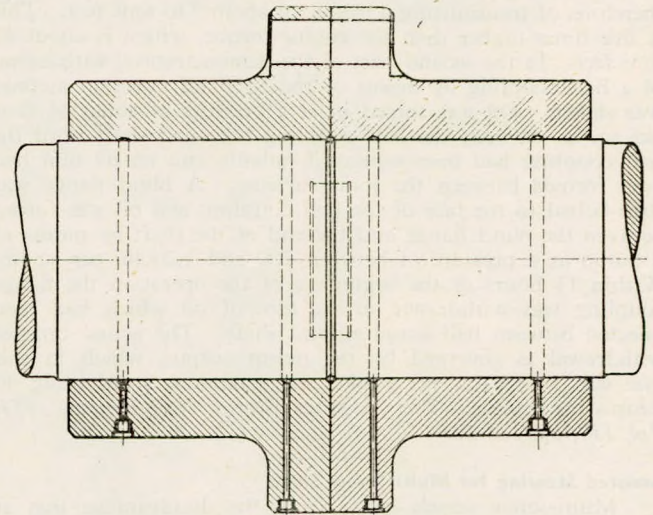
Cross-section of the new SKF FK type of coupling for ships' tunnel shafts
